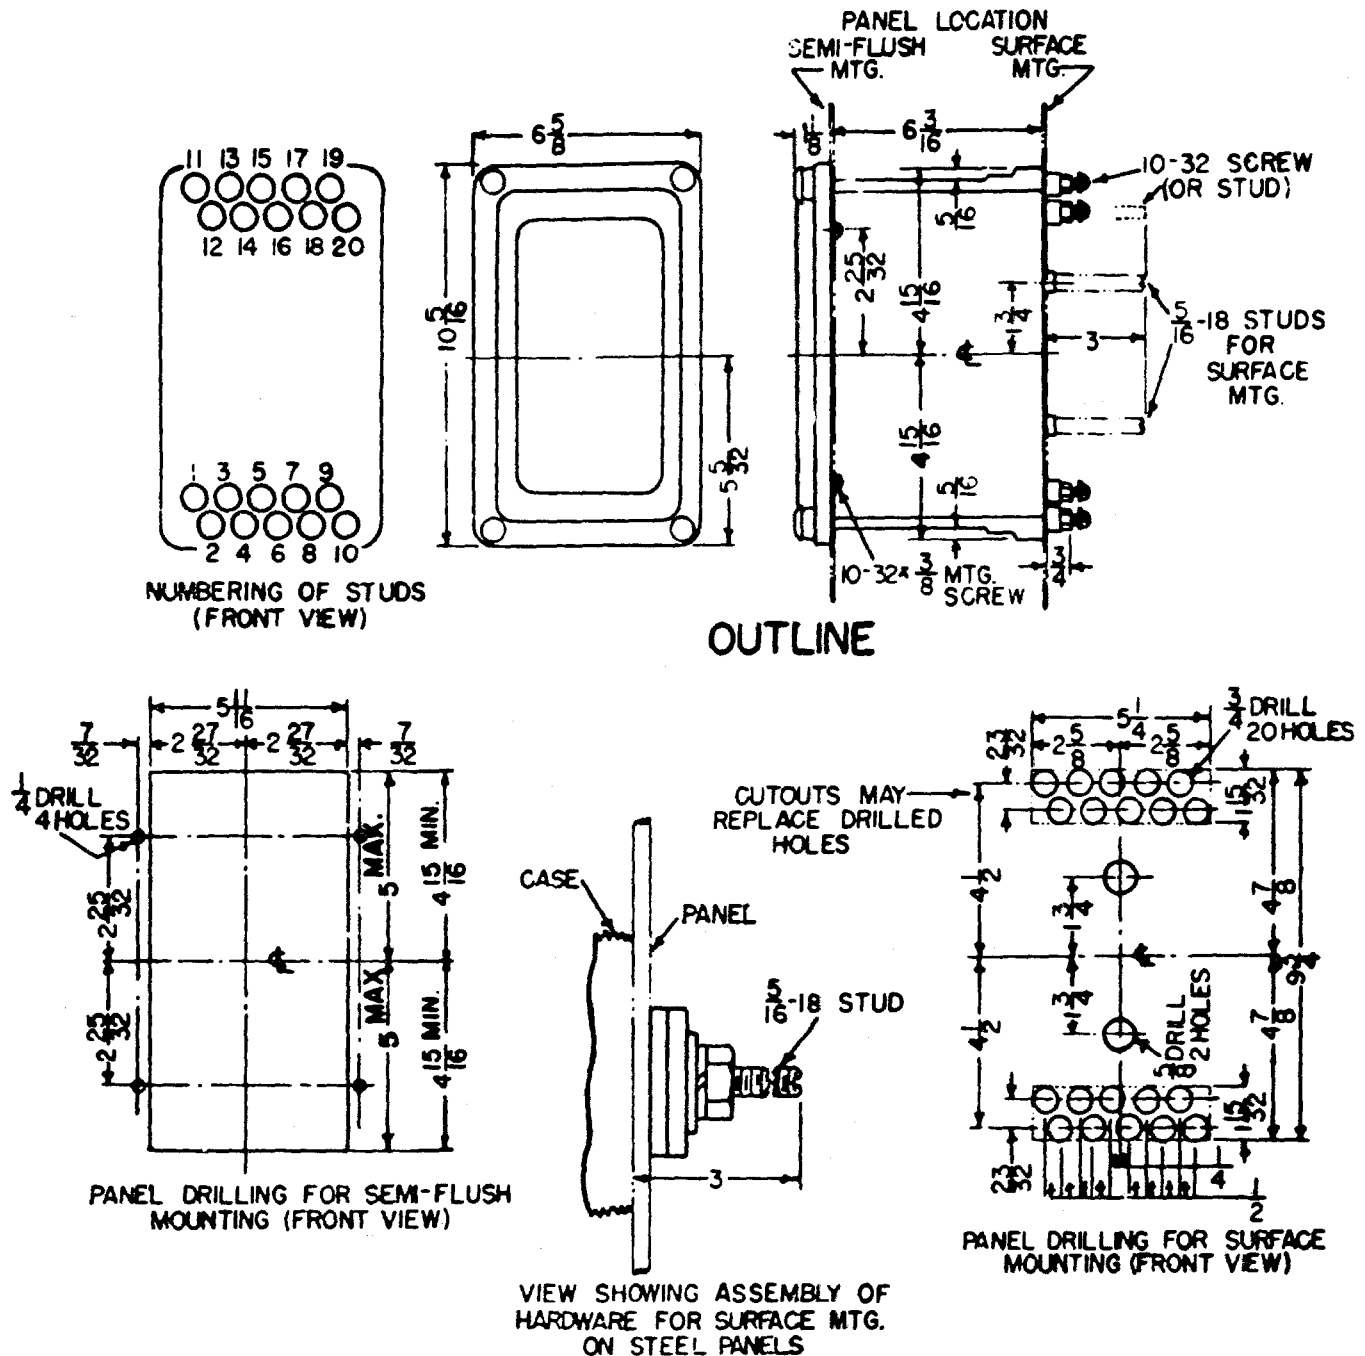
(6029272-2) Outline and Panel Drilling Dimensions for Type NAA22L Relays
